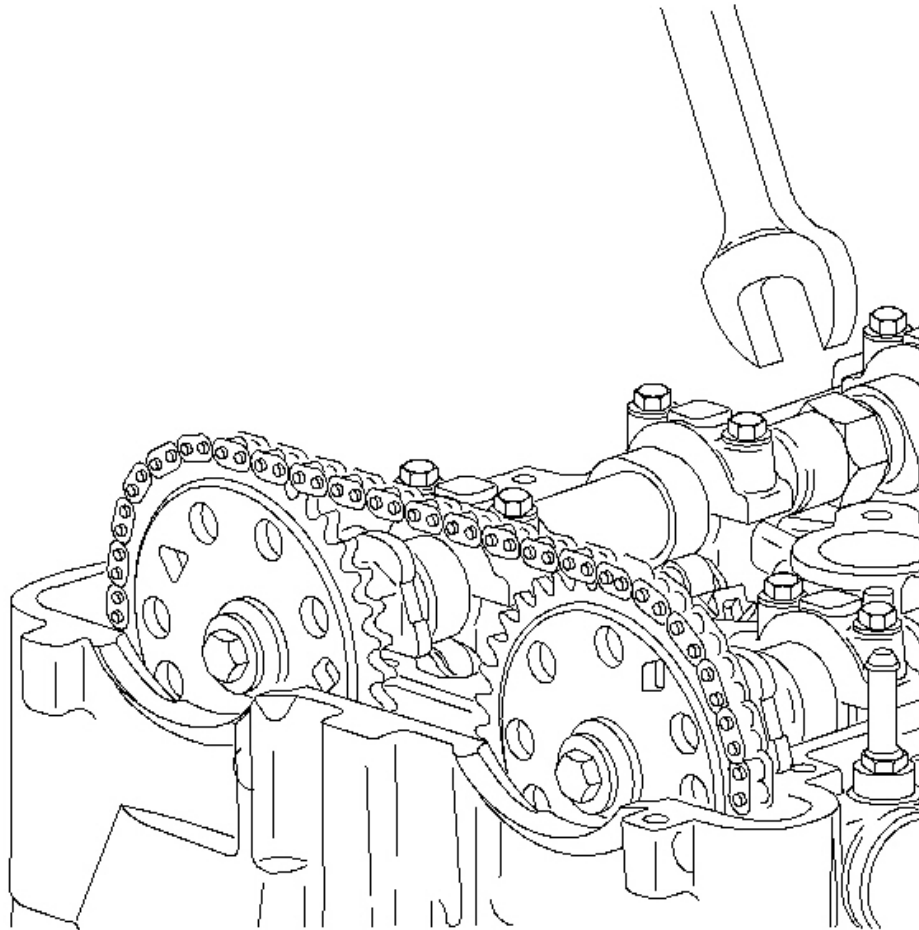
Using 24 mm Wrench To Support The Camshaft
